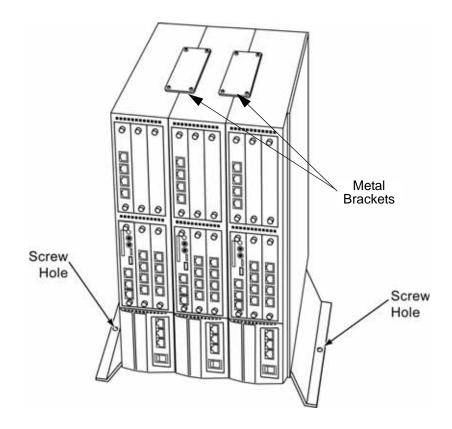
Install Additional Brackets from CHS2U JOINT BRACKET KIT
